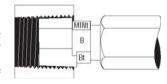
Checking minor diameter truncation with 6 step plain Plug Gages.
